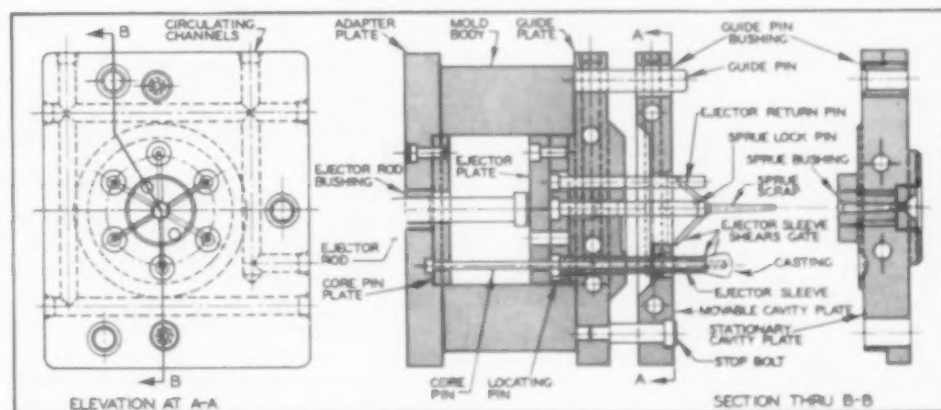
Another six-cavity mold producing a knob for use with a press-fitted insert. Mold opens after injection cycle, molded knobs are stripped from core pins and drop free. Sprue lock-pins push sprue and runners through center hole of cavity plate, enabling sprue scrap to fall free.
